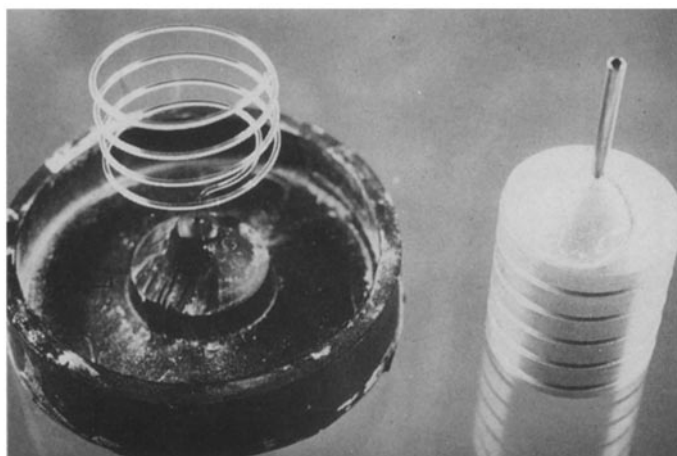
The mandrel of aluminium (right) with a machined track for the shaping of a spiral and a helix of a polamid wire mounted in the crucible former (left).
